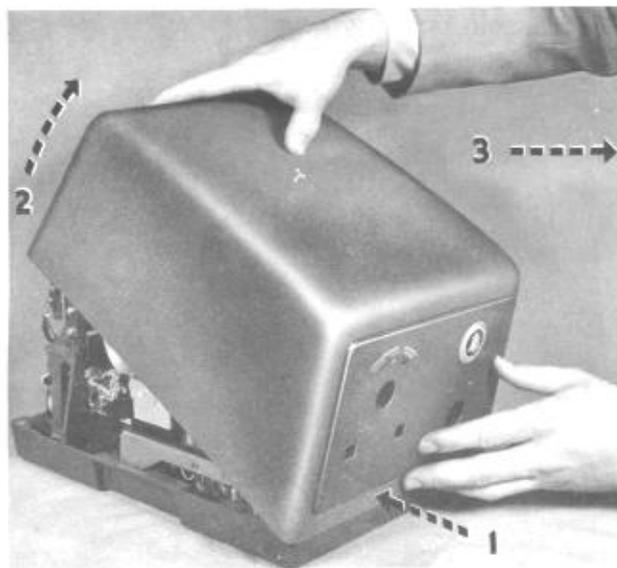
Hand Position and Direction of Movement in Removing Cover
